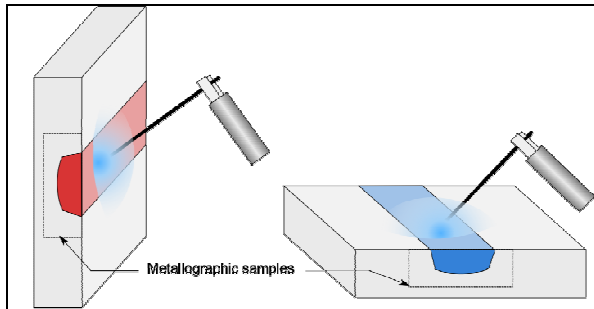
Schematic view of (left) horizontal / vertical and (right) Flat welding position.
